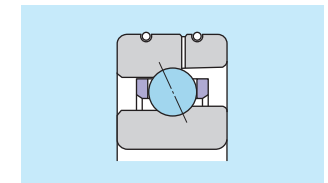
Air-oil lubricated high speed angular contact ball bearings with re-lubricating hole on the outer ring
